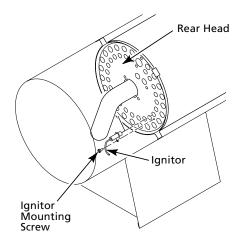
Removing Ignitor Mounting Screw and Ignitor
